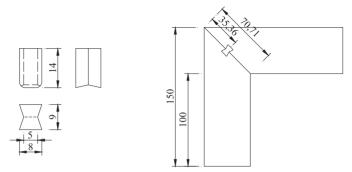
(a) Plastic dovetail fitting (dimensions are in mm) (b) Position of the test pieces and the plastic dovetail fitting
